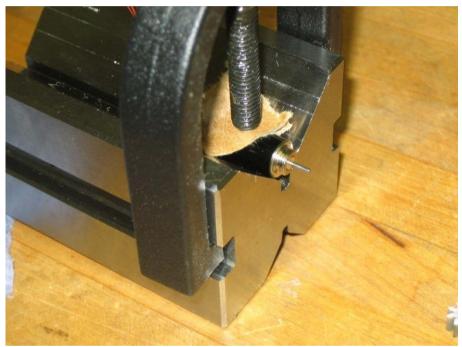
Picture showing how the motors were clamped in the v-block used to mount the pinions on the motor shafts.
